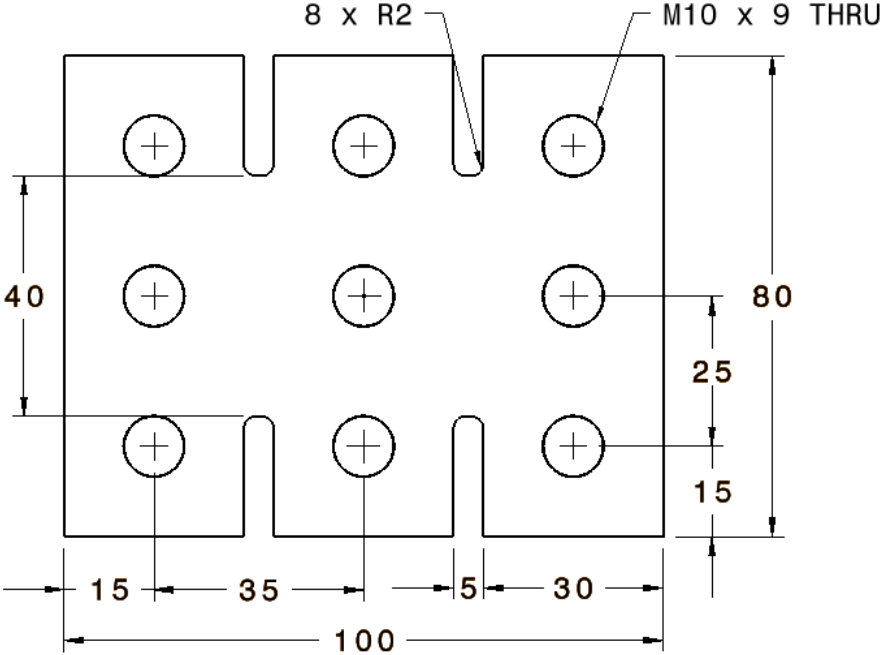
Drawing of the optimized cyclic shear test specimen (dimensions are in mm)
